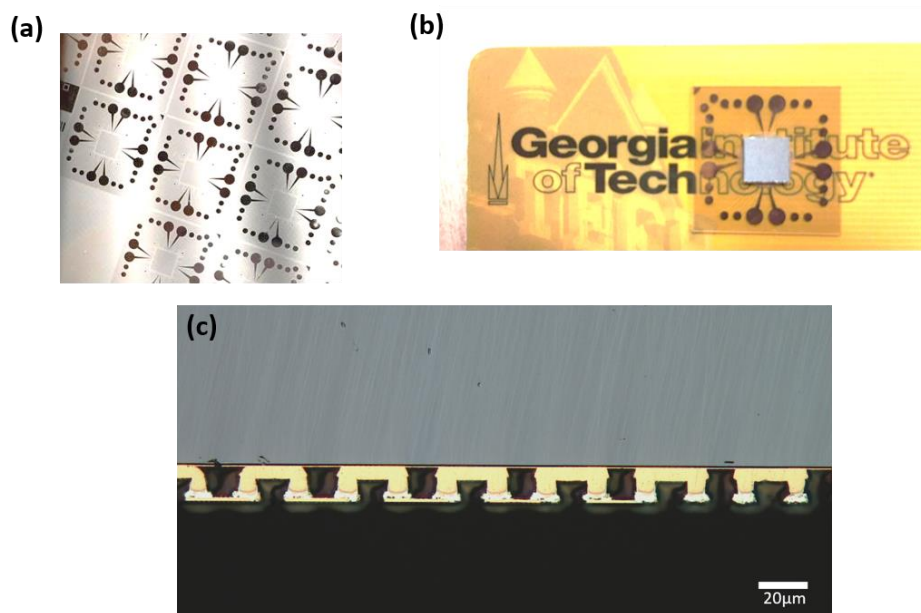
The (a) fabricated TV3 glass substrate, and the (b) top view and (c) cross-section of the assembled glass package.
